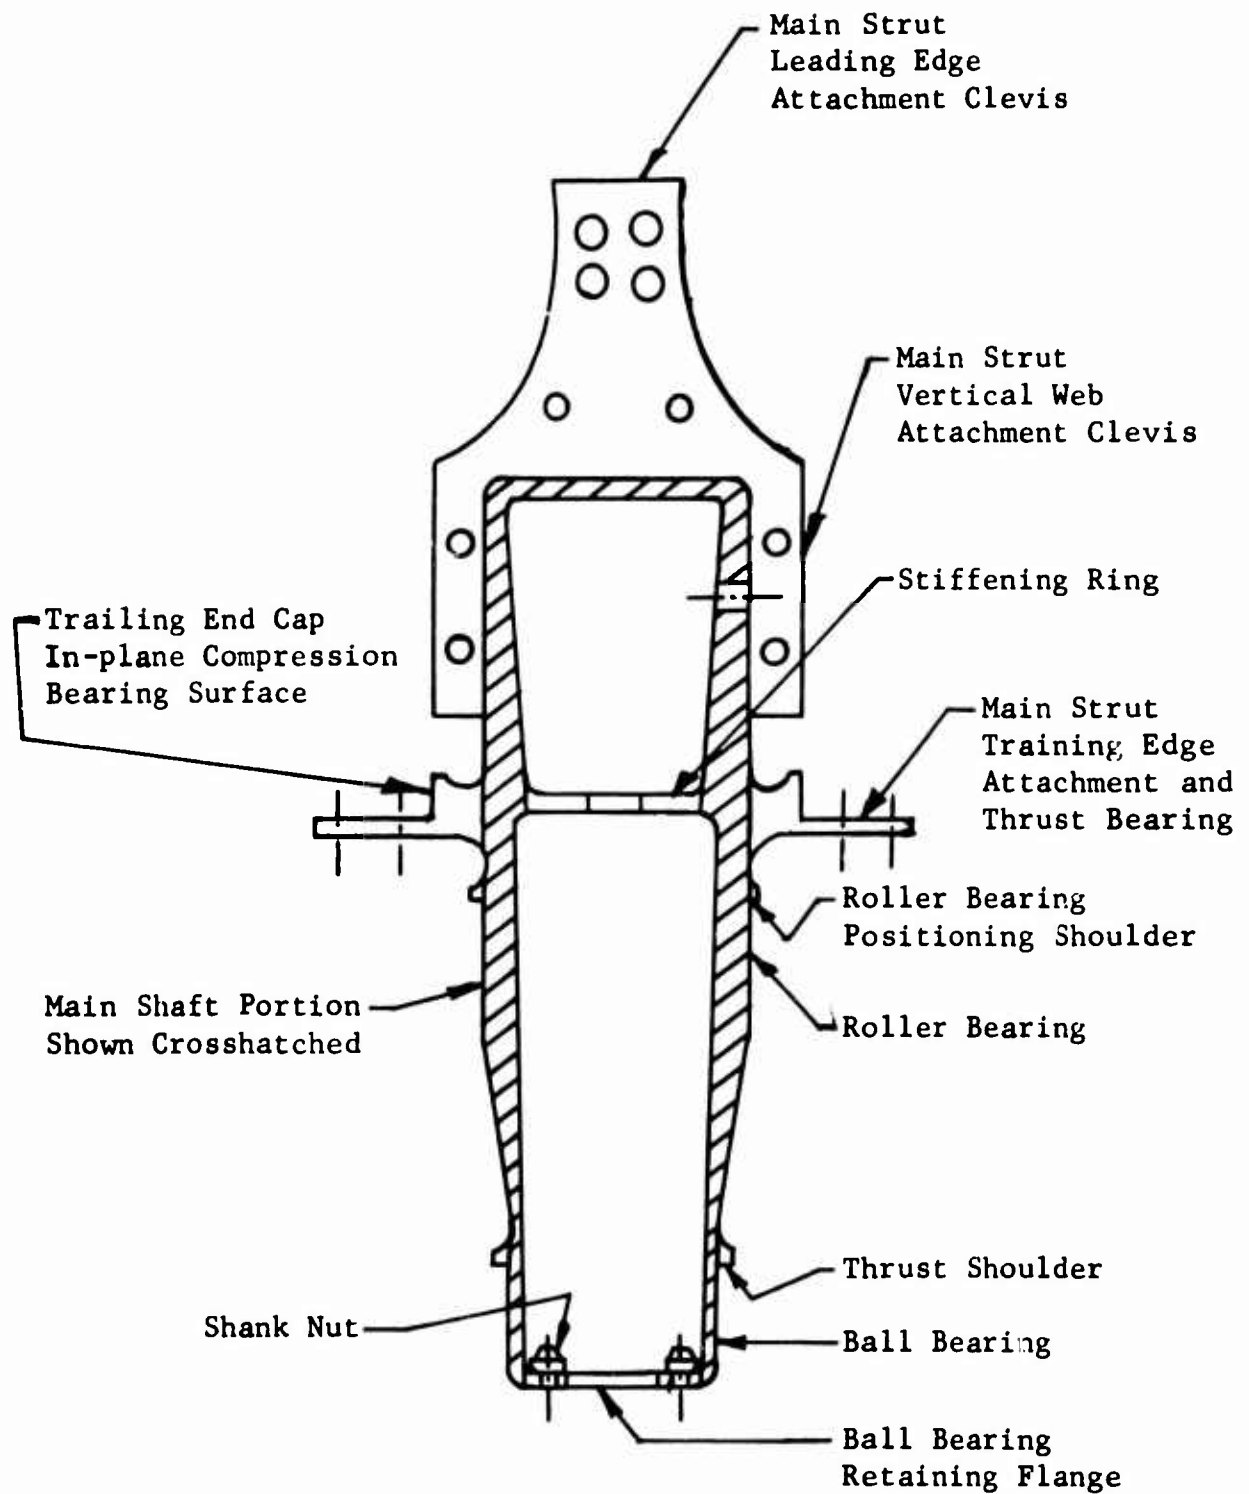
View Showing Cross Section of Hub In-plane of Major Strut for the Purpose of Identifying its Integral Component Parts, See Figure 28.
